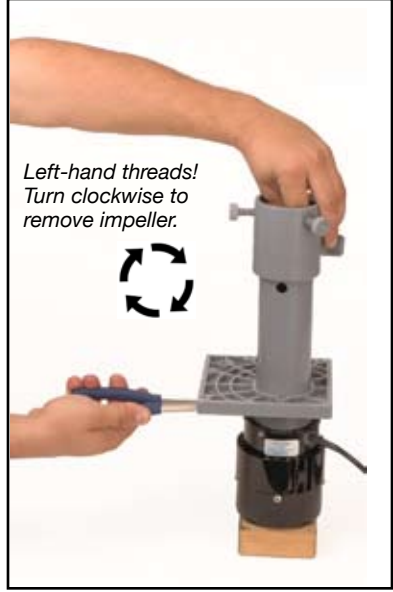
Grip shaft with pliers. Turn impeller clockwise with hand.
